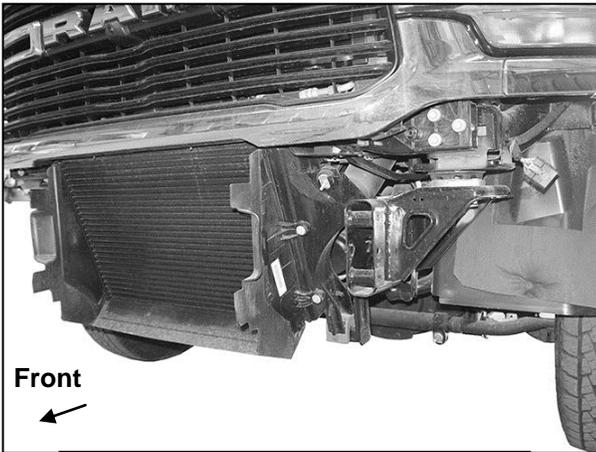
Locate and remove driver/left side bumper bracket to frame hardware (arrows)
